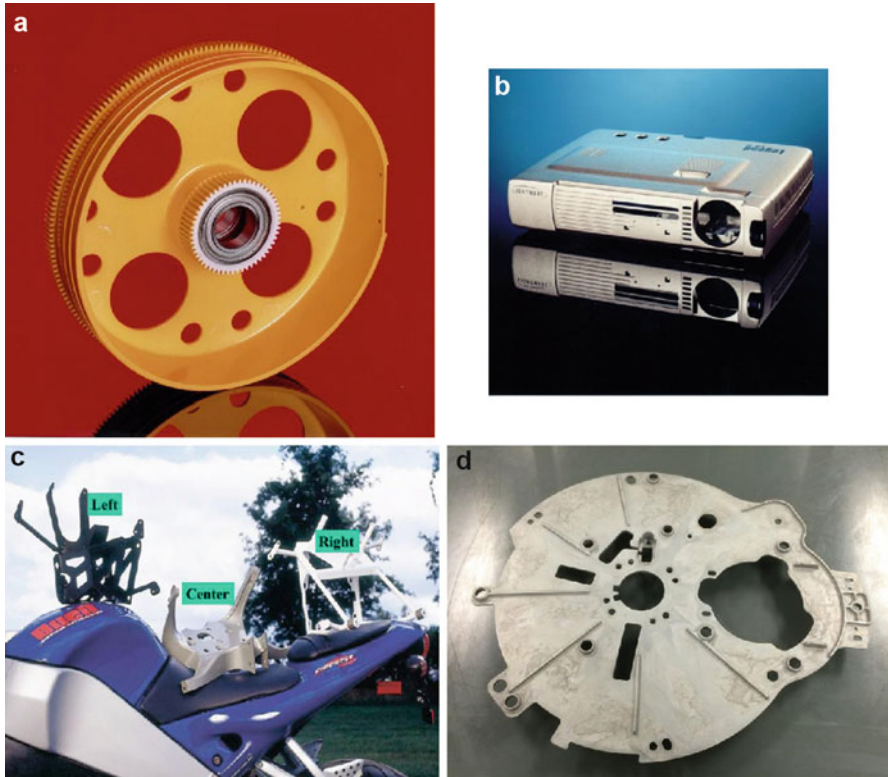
Thixomolded components produced for several different applications. (a) Drive gear, (b) mini-projector, and (c) components thixomolded for a motorcycle, AM60 (courtesy of Thixomat Inc., and Japan Steel Works), (d) plate replaced a stamped part (courtesy of Phillips-Medisize Corp.)
